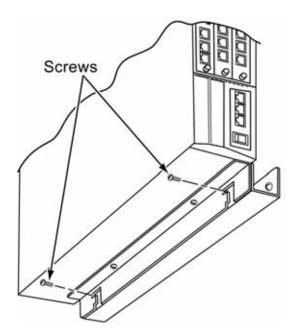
Secure Metal Fitting to Lower Wall Mount Bracket with Screws
